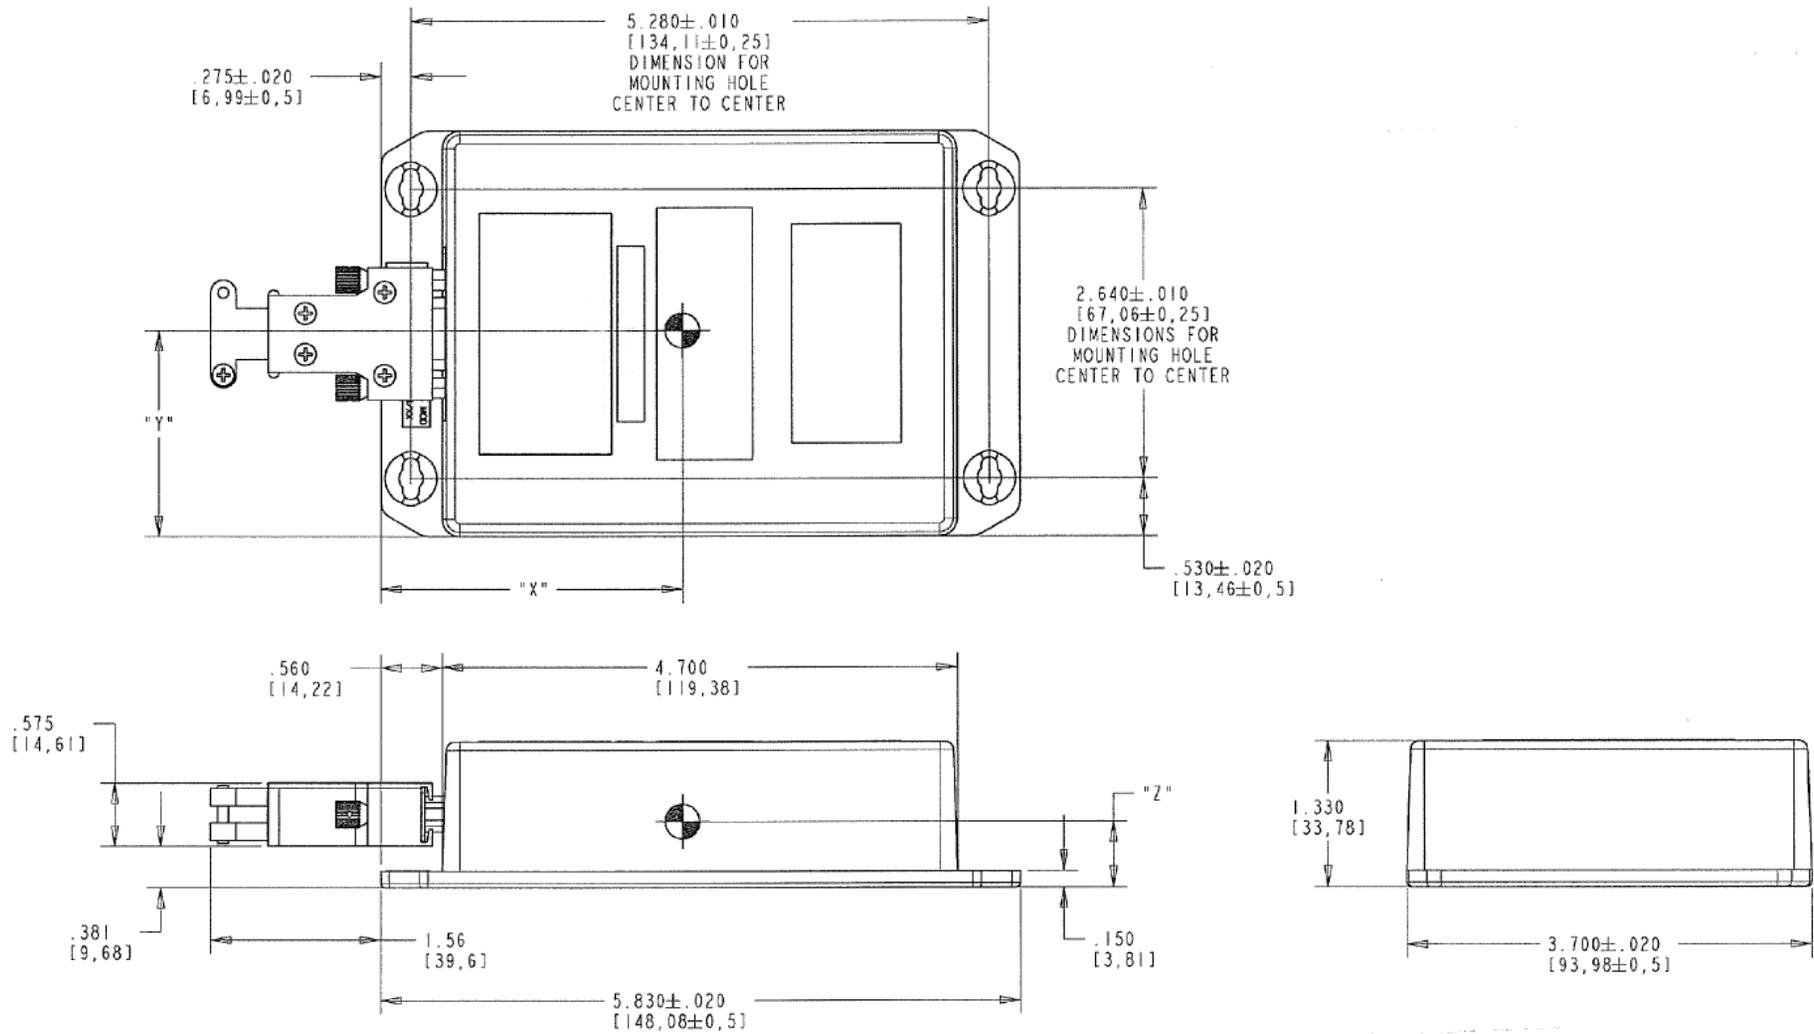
KDC 100EXP Outline and Mounting Drawing (Sheet 1 of 2)
